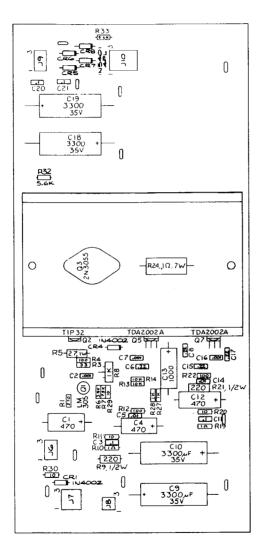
Regulator/Audio II PCB Assembly A035435-04 D
